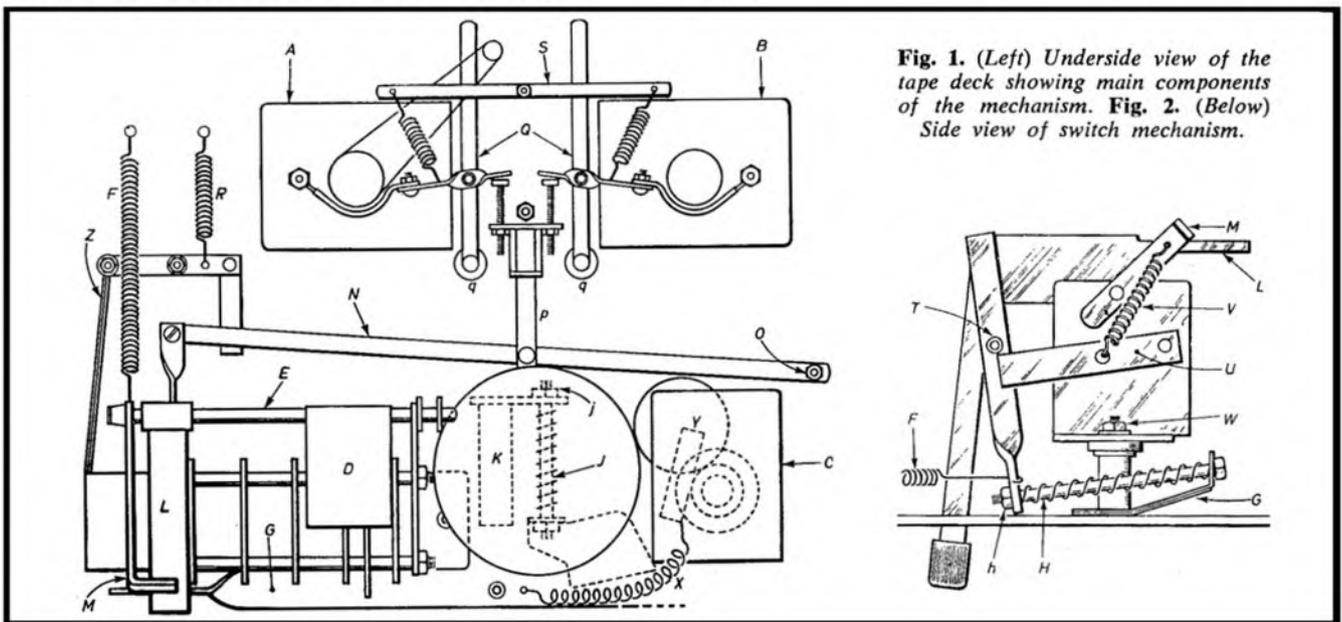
(Left) Underside view of the tape deck showing main components of the mechanism. Fig. 2. (Below) Side view of switch mechanism.
